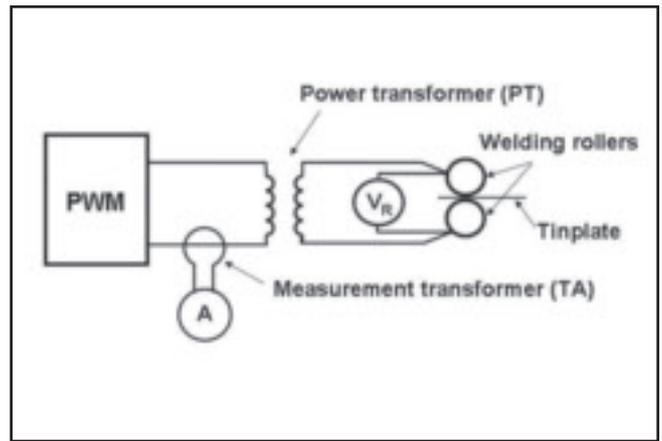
Electrical schematics of the welding machine power circuit. V_R represents the voltage between the welding rollers. The system features two transformers; one (TA) is used to measure the current flowing through the primary coil of the other (power) transformer (PT).
